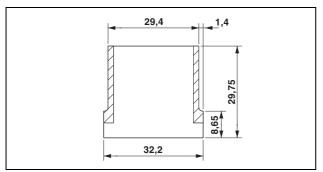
Dimensions of the PCB with housing cover ME-IO 18,8 C 3U 7035
